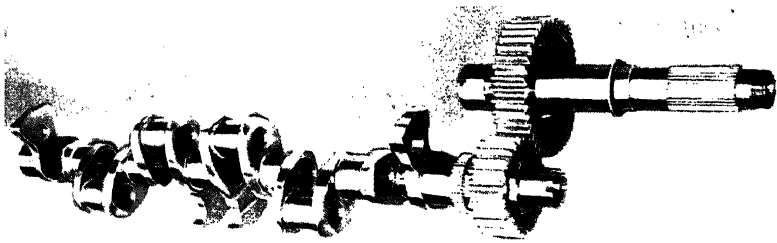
Crankshaft and airscrew drive of the "Gipsy Twelve" inverted Vee-type engine.
